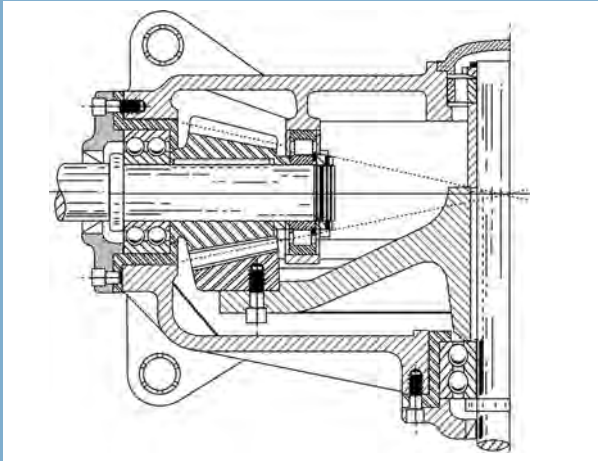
Typical straddle mounting for both members of a spiral bevel pair
